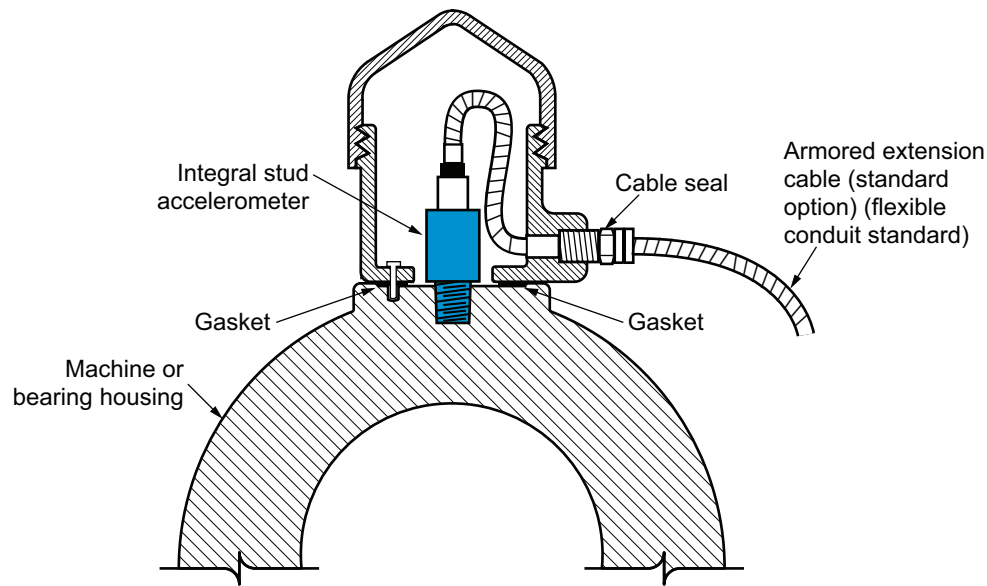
Typical Nonflush-mounted Arrangement for Integral Stud Accelerometer with Protection Housing
